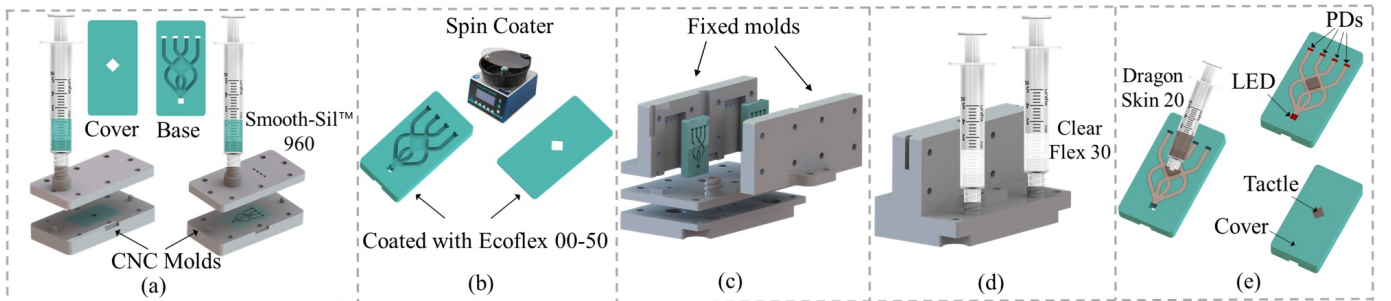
Fabrication process of the proposed sensor: (a) Creation of the soft base and cover using Smooth Sil™ 960, and cured for 16 hours in CNC-printed molds. (b) Formation of the cladding layer by spin-coating Ecoflex 00-50, followed by a 3-hour curing period. (c) Positioning of the cladded base and cover in a fixed mold, secured with screws. (d) Injection of Clear Flex 30 to form the waveguide core, with a subsequent 16-hour curing. (e) Application of a tactile layer made of Dragon Skin 20 over the sensing area, cured for 4 hours, and final assembly of LEDs and photodiodes.
